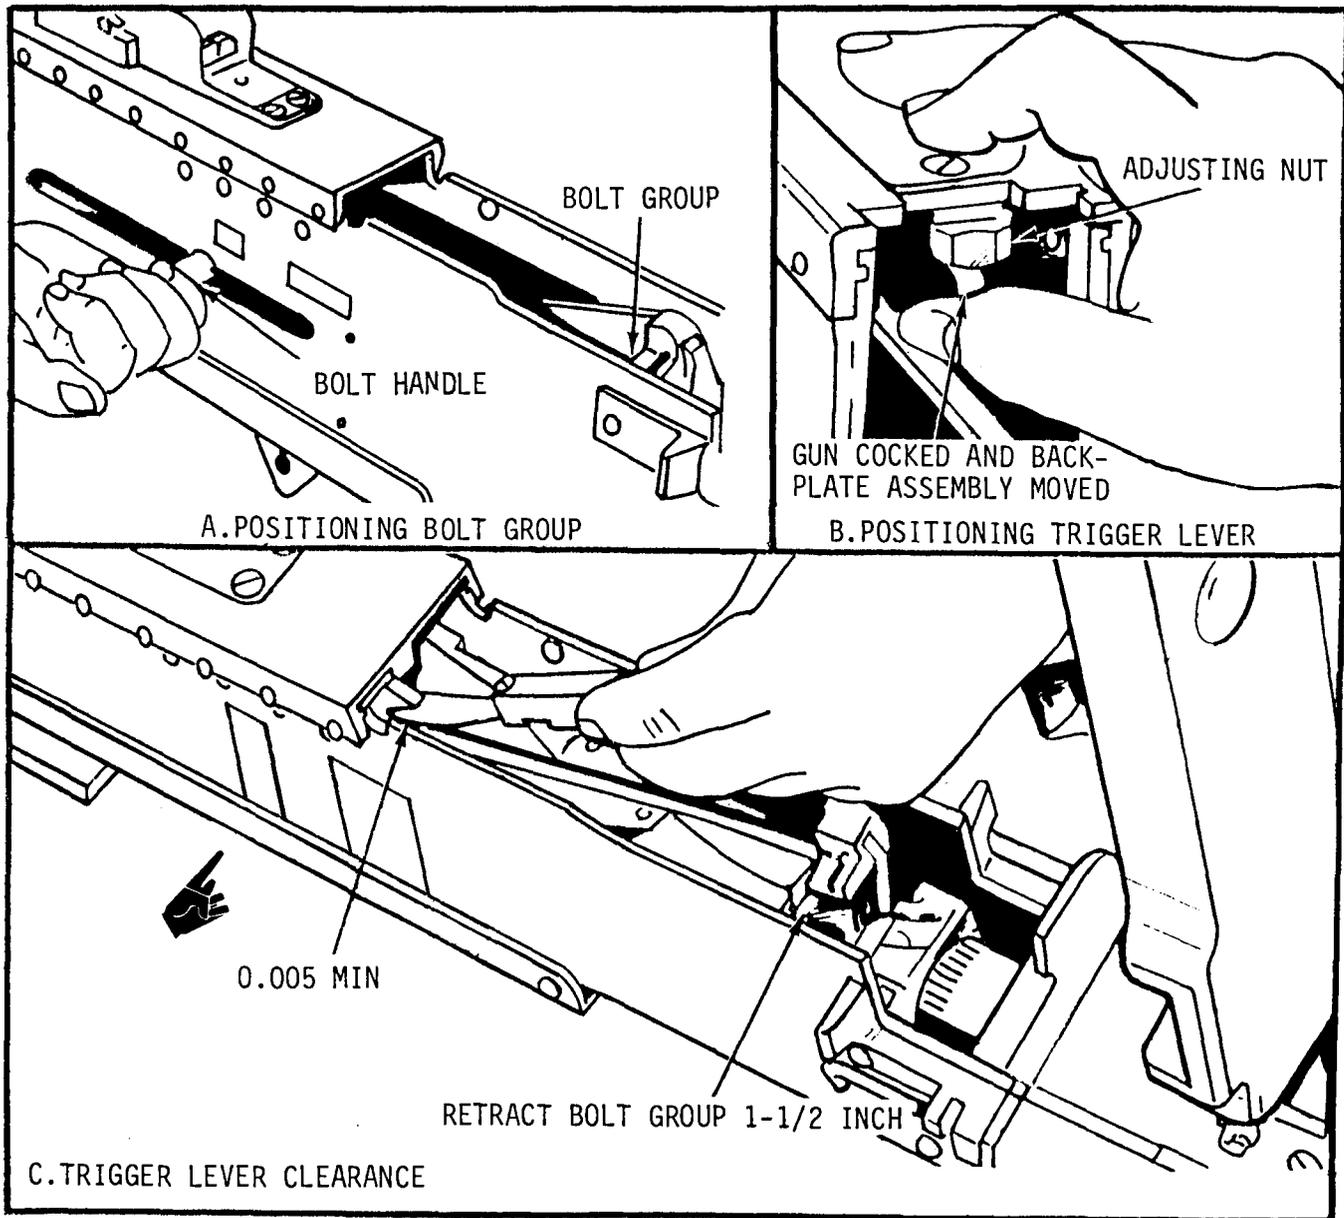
Checking clearance between top of bolt and bottom of trigger lever.
